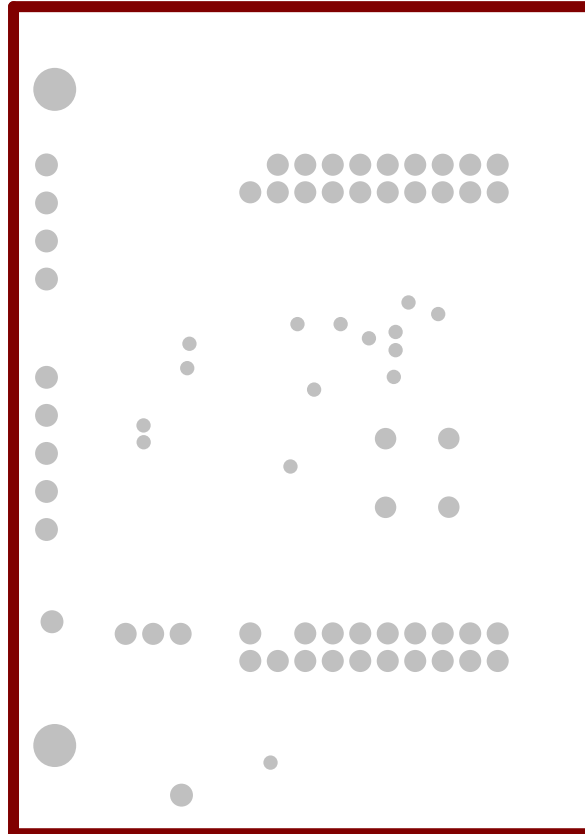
PCB Layout (internal GND Plane 2) for the ADS122x14EVM
